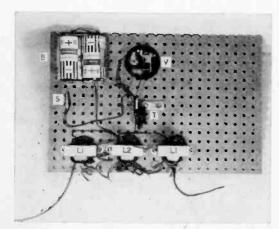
Follow the parts placement indicated in the photograph above. Switch is a Mueller Minigator clip.
